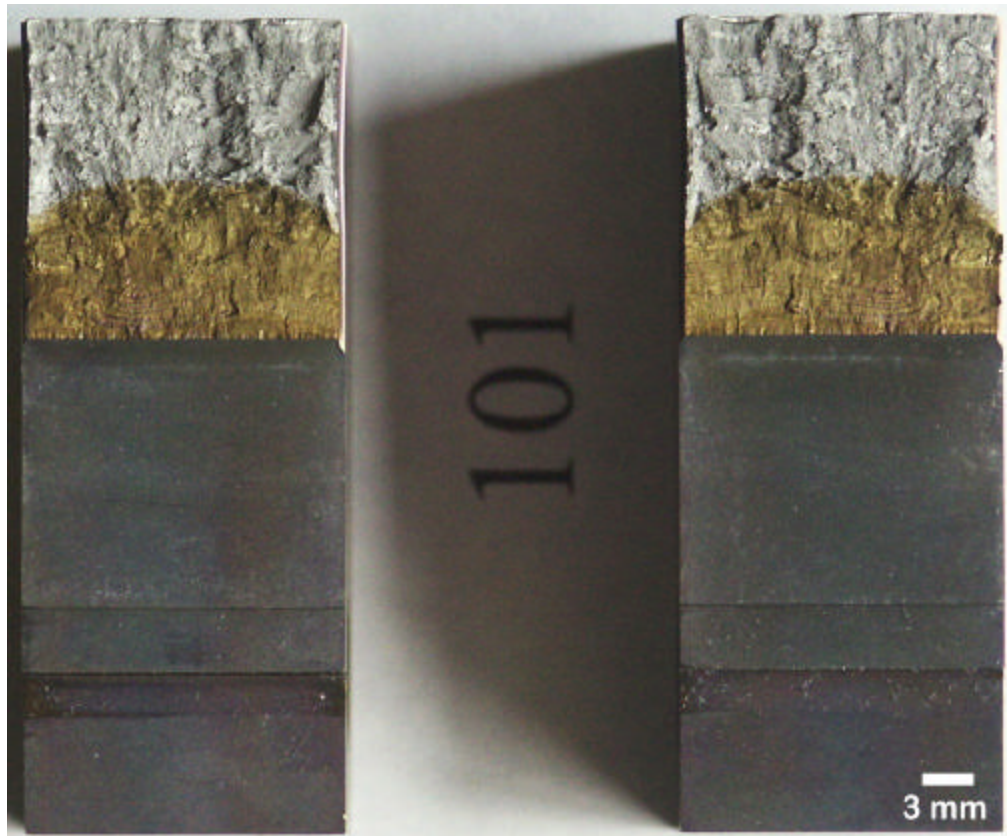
Typical compact tension specimen fracture surfaces from Ti5111 modified 50 ppm Y filler metal weld. Note increased aspect of brittle fracture as compared to the base metal but with a slightly more ductile aspect as compared to the matching filler metal.
